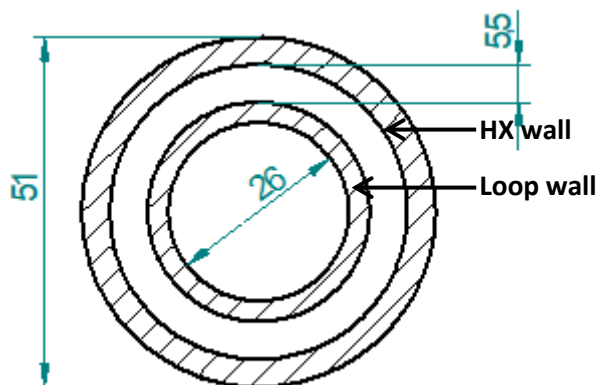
Cross section view of the heat exchanger (Dimensions in mm)
